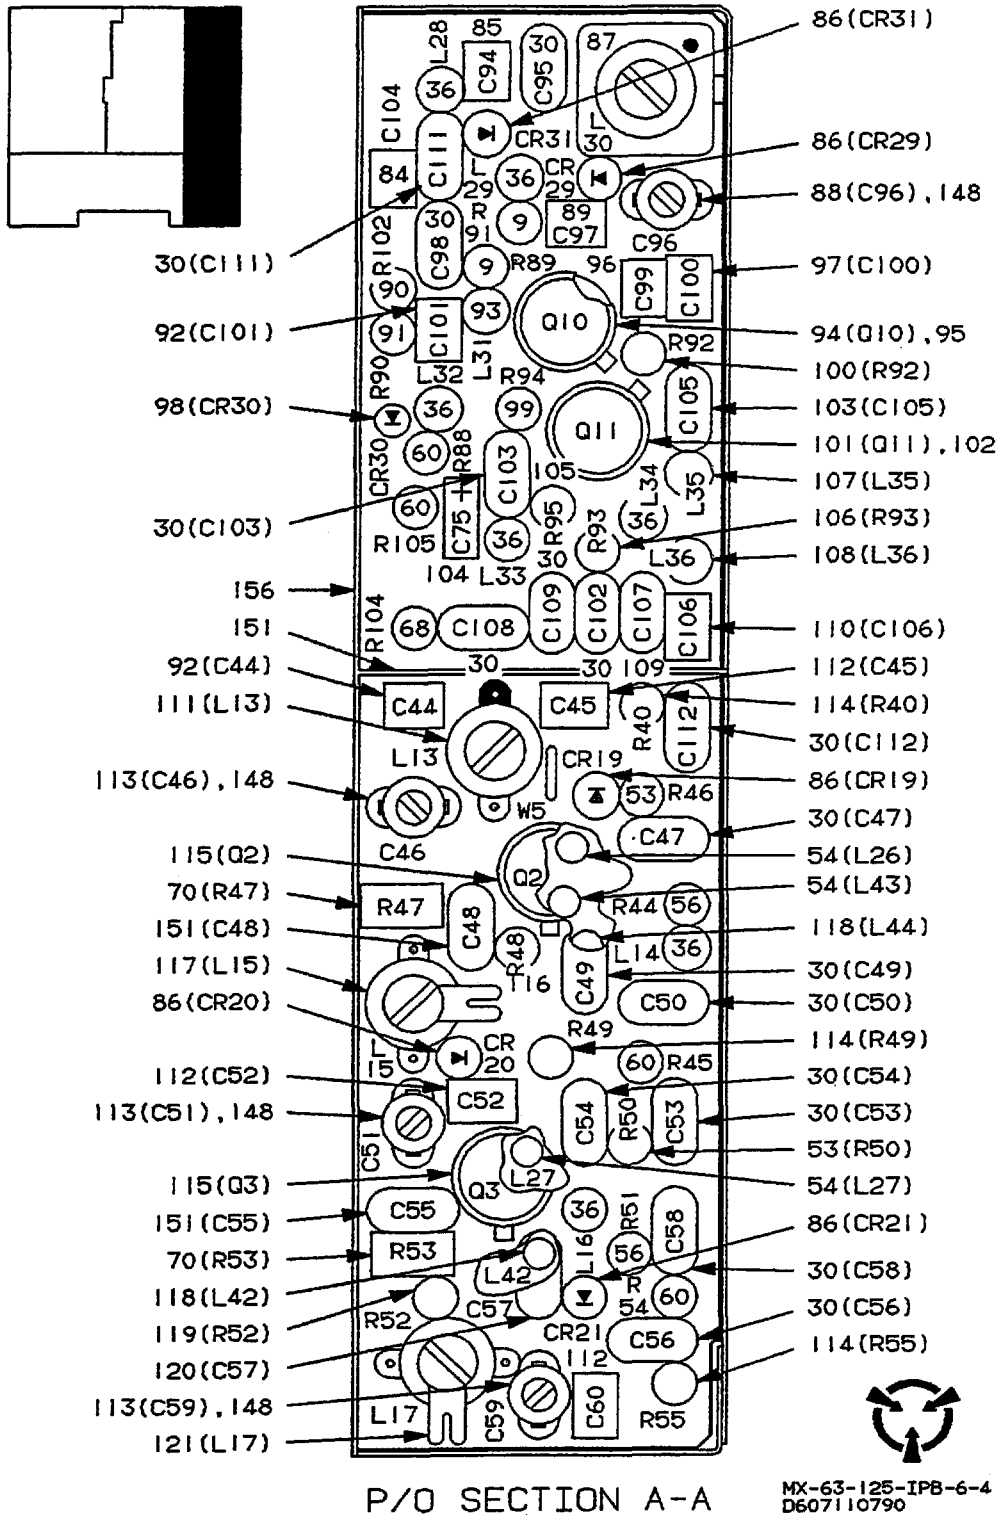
High Band RF/IF Module Assembly (Sheet 4 of 6)
